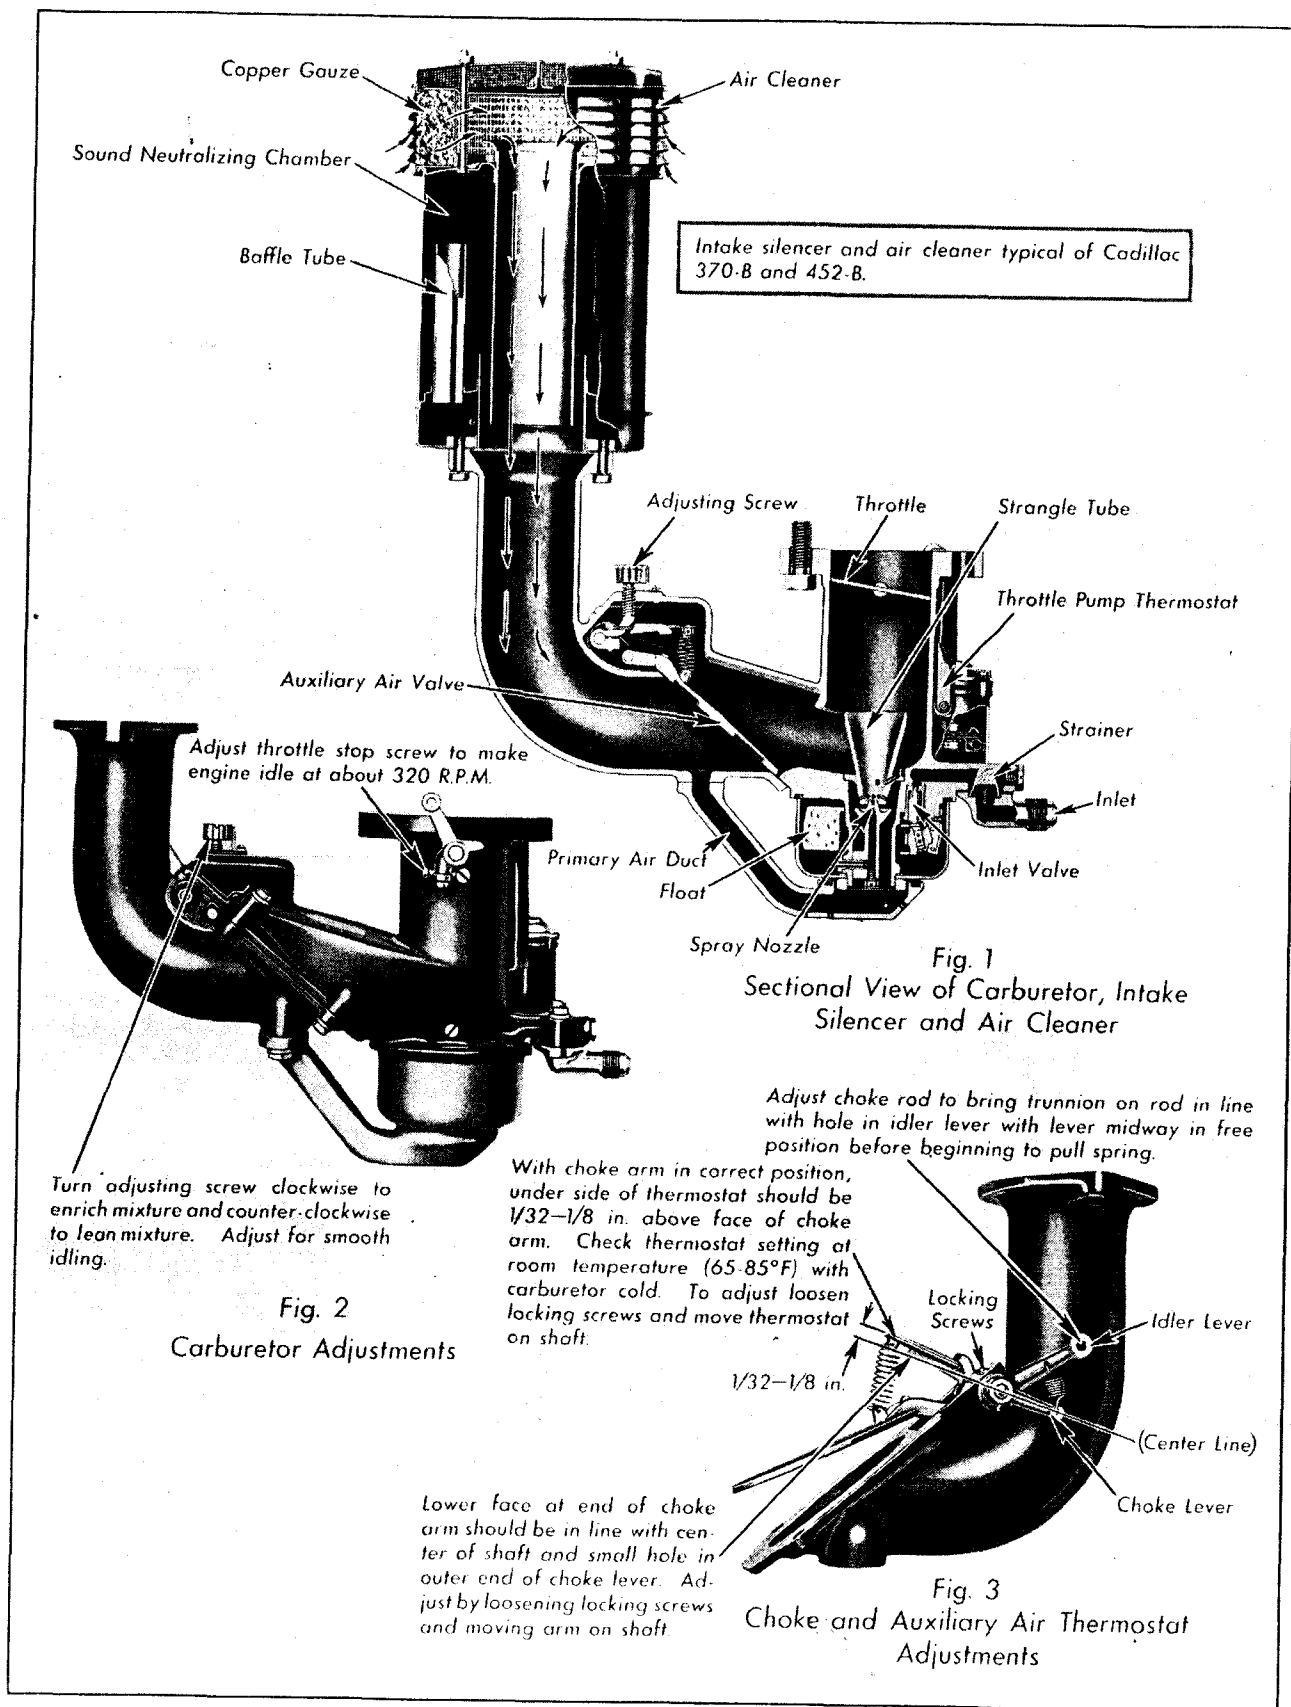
Carburetor Details and Adjustment and Intake Muffler—Cadillac 355-B—LaSalle 345-B
